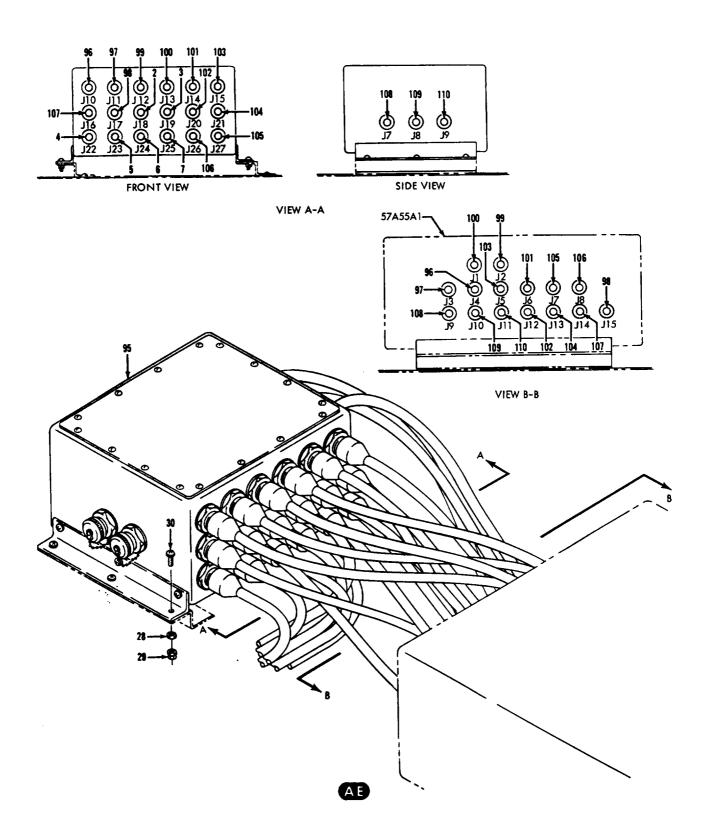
Electrical Equipment Installation (Sheet 10 of 19)
